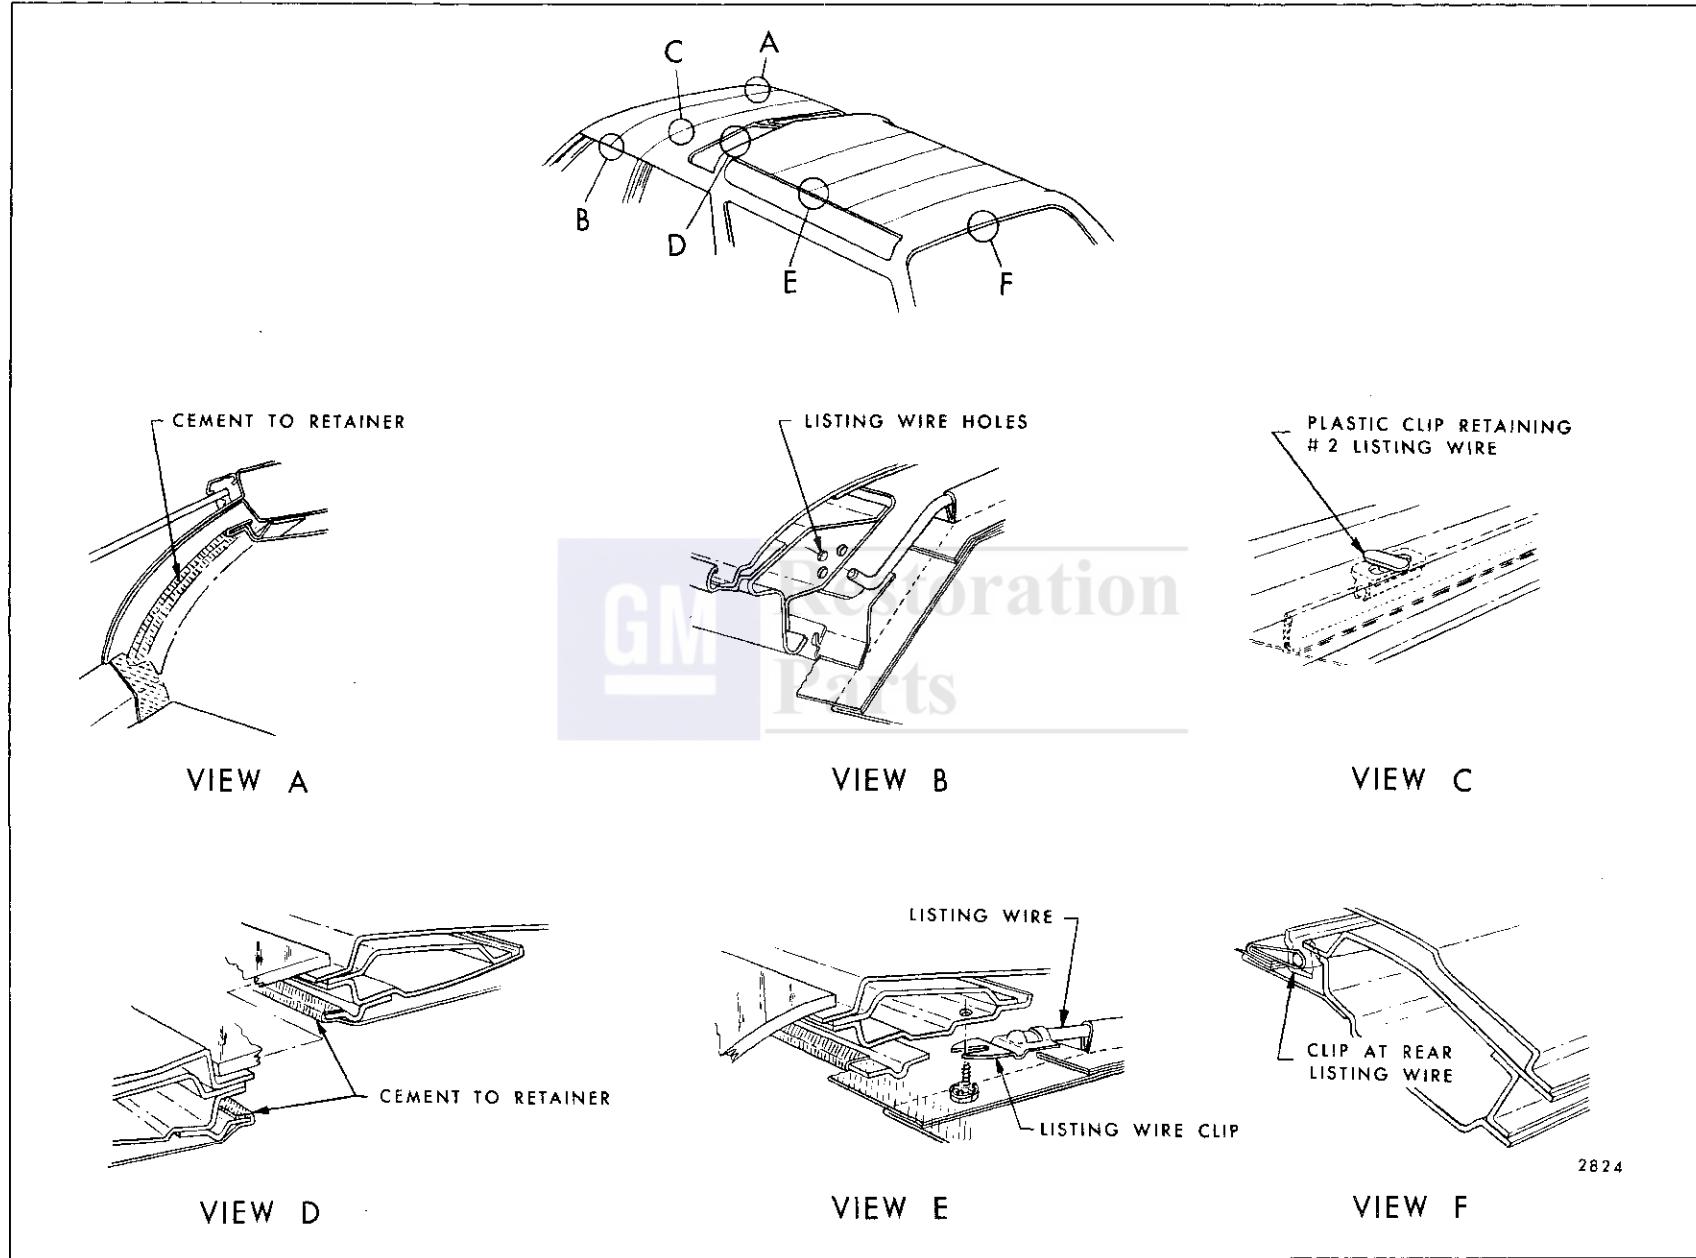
Headlining Installation - "55" and "65" Styles
